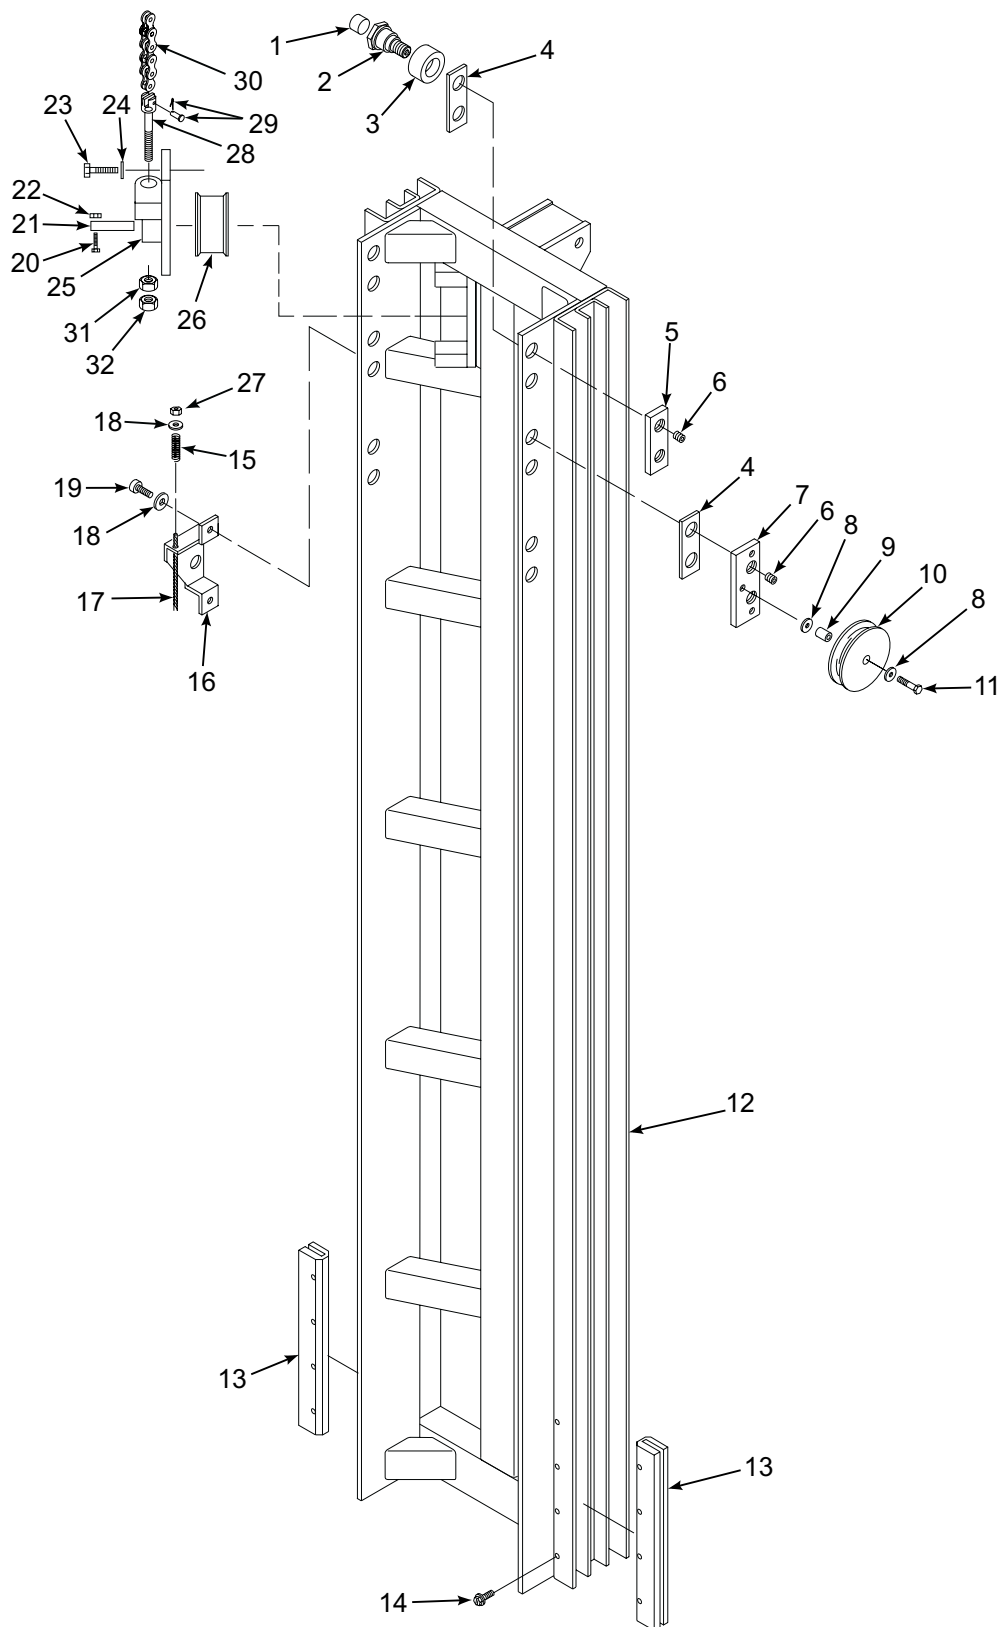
Main (Welded) Mast Exploded View
